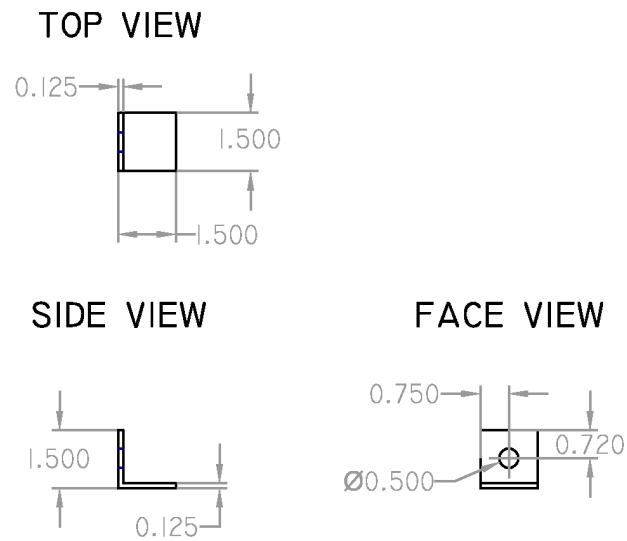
(continued). Blueprints of the parts used to build the second version of the heat flow measurement device with a single central hole: (e) L-support for handle attachment underneath the plate. Dimensions are in inches.
